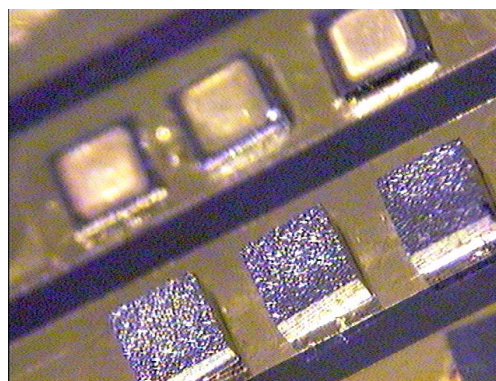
Side view of two-batch controlled micro-assembly. Foreground: Second batch of $1mm^2$ parts assembled (approximately $0.5mm$ thick; unpolished backside is visible). Background: First batch $1mm^2$ thin parts assembled.
